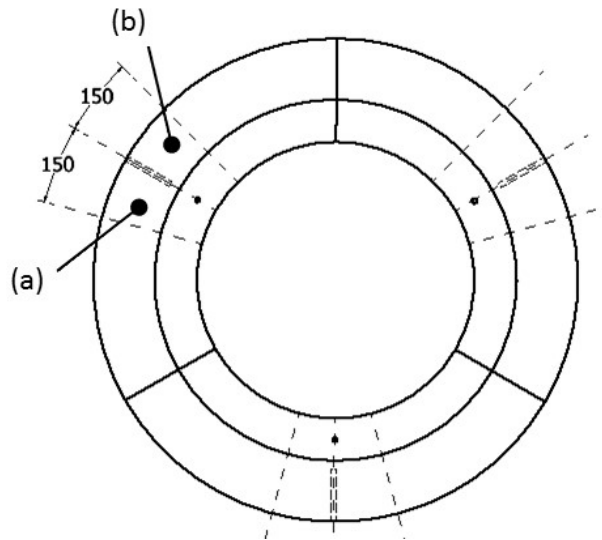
Sampling location zone for (a) tensile, impact and (b) CTOD testing specimens on the ring segments. Units in millimetres.
